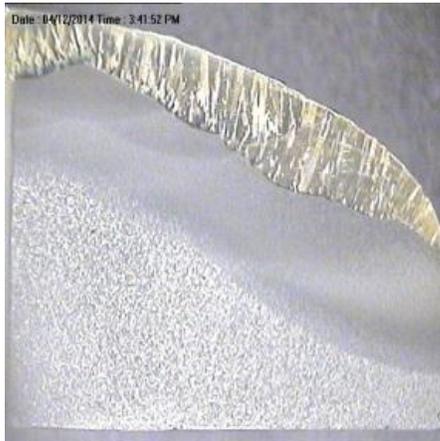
(a) Macrostructure of RE115 Rail Welded with Magna 488-Rail
